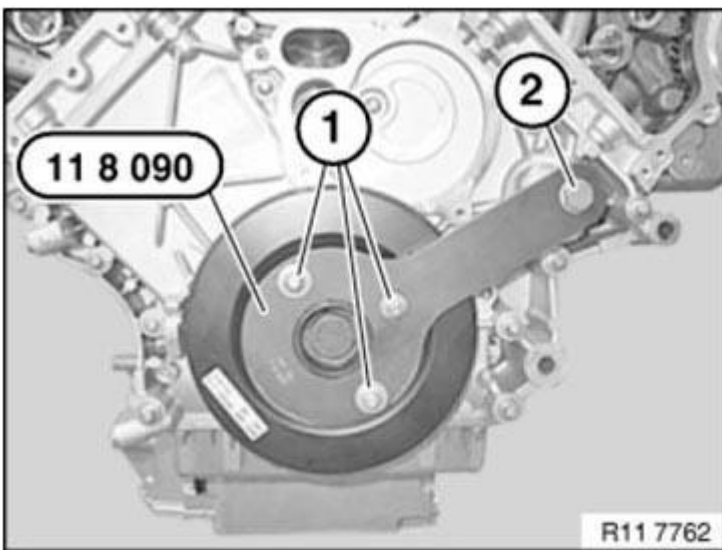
Securing Special Tool 11 8 090 With Belt Tensioner Bolt To Timing Case Cover
